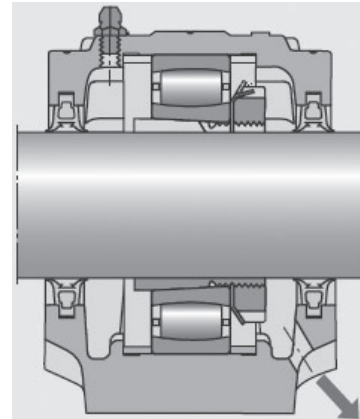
SPHERICAL ROLLER BEARING INTERNAL CLEARANCE MEASUREMENT
